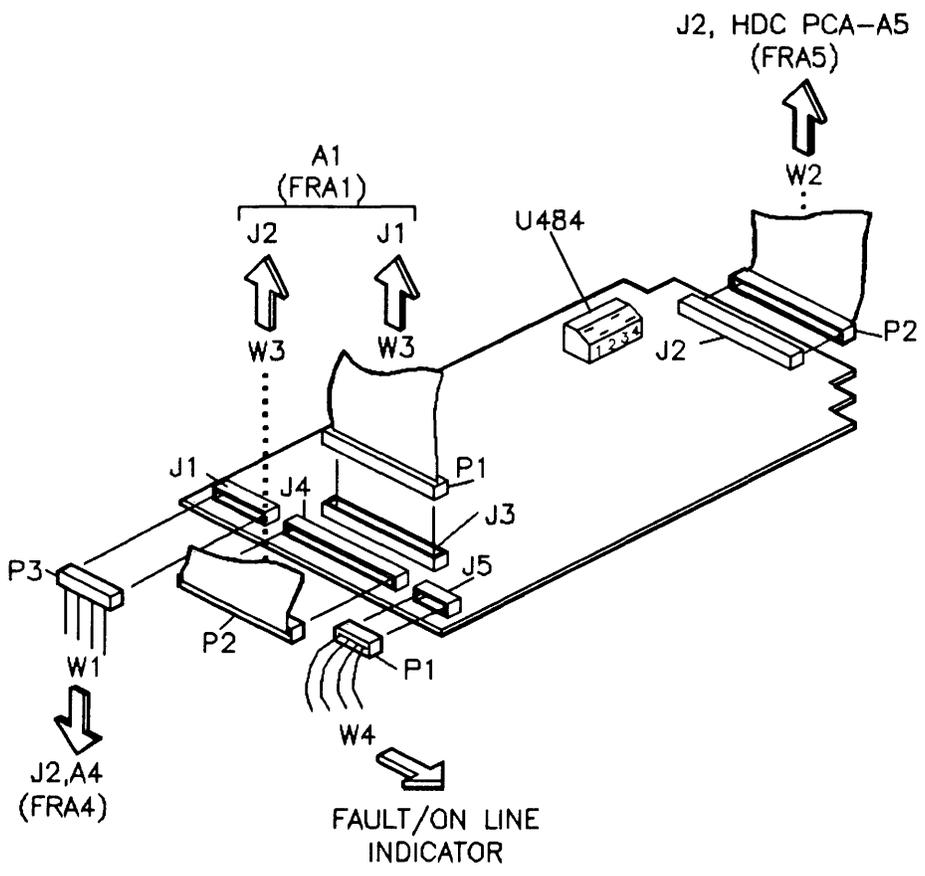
FRA1 (Disc Drive A1), Layout and Cable Connections
